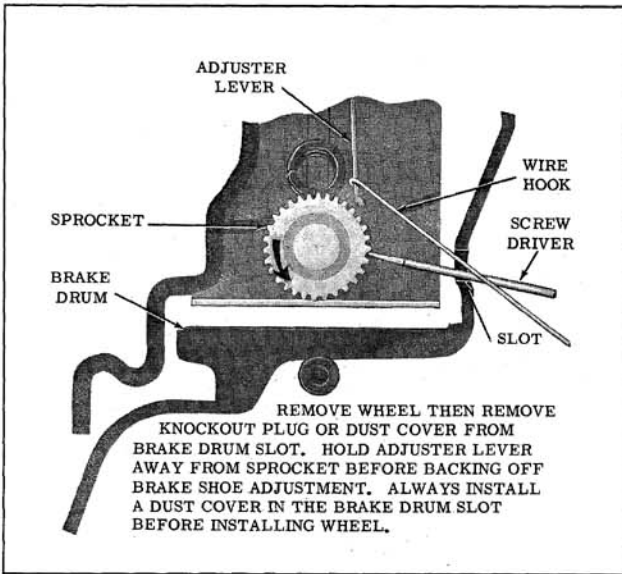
Backing Off Brake Shoe Adjustment (54 through 86 Series)
